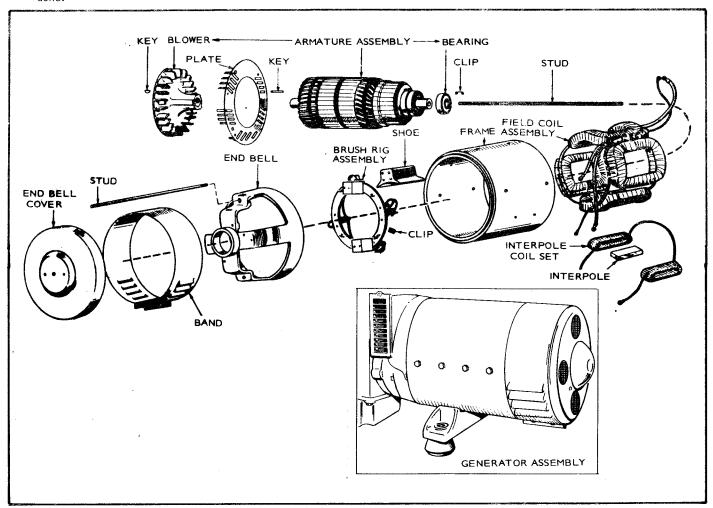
, 5-2. TYPICAL WELDER GENERATOR ASSEMBLY
